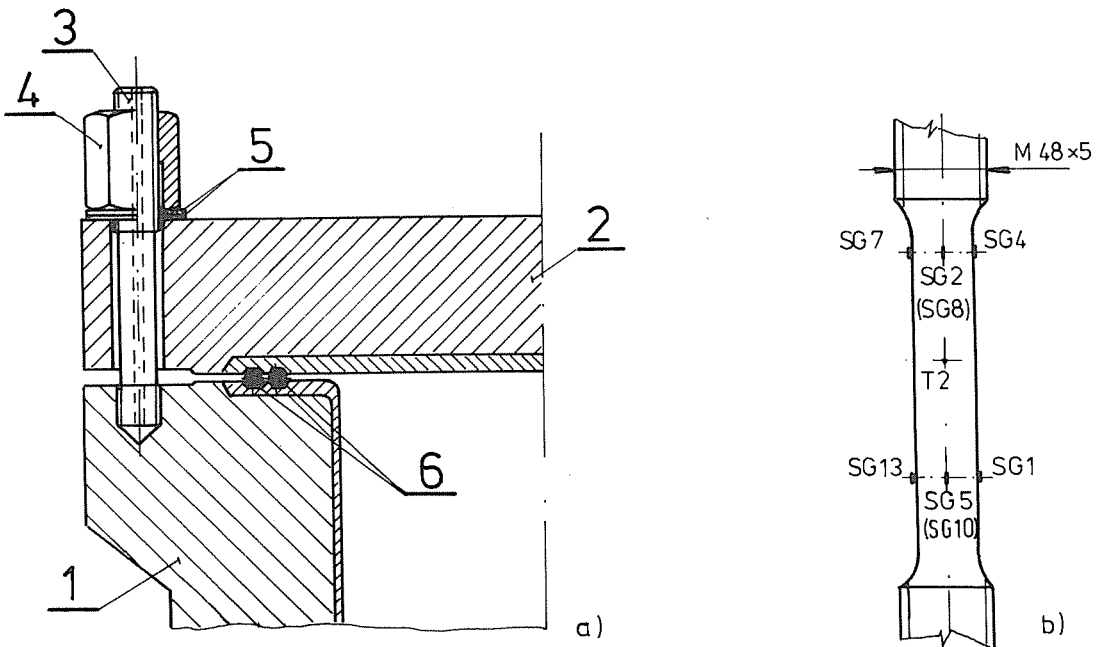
a) Bolt joint, 1 - flange of primary collector, 2 - cover, 3 - bolt, 4 - nut, 5 - two pads, 6 - two packing rings
